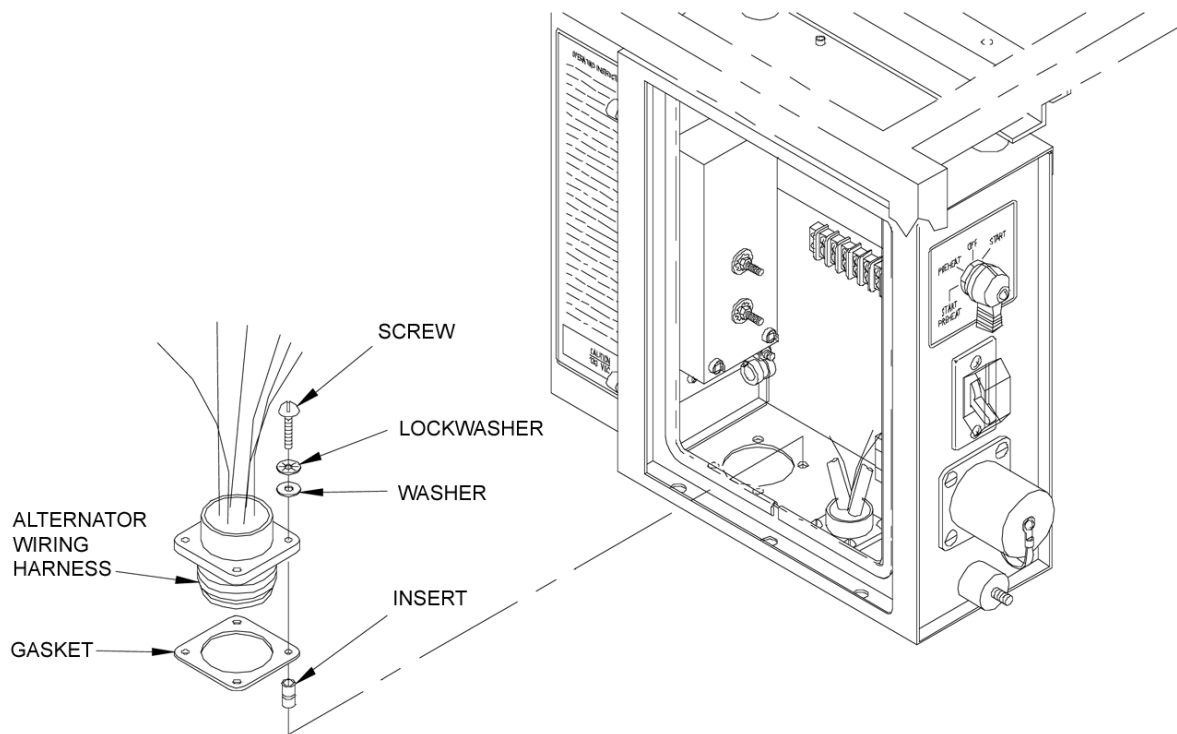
Alternator Wiring Harness and Gasket, Control Panel.
